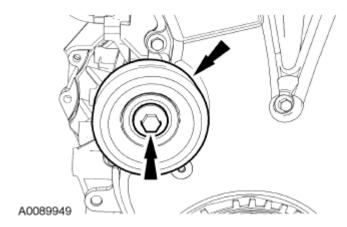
Locating Bolt And Accessory Drive Belt Idler Pulley Courtesy of FORD MOTOR CO.
